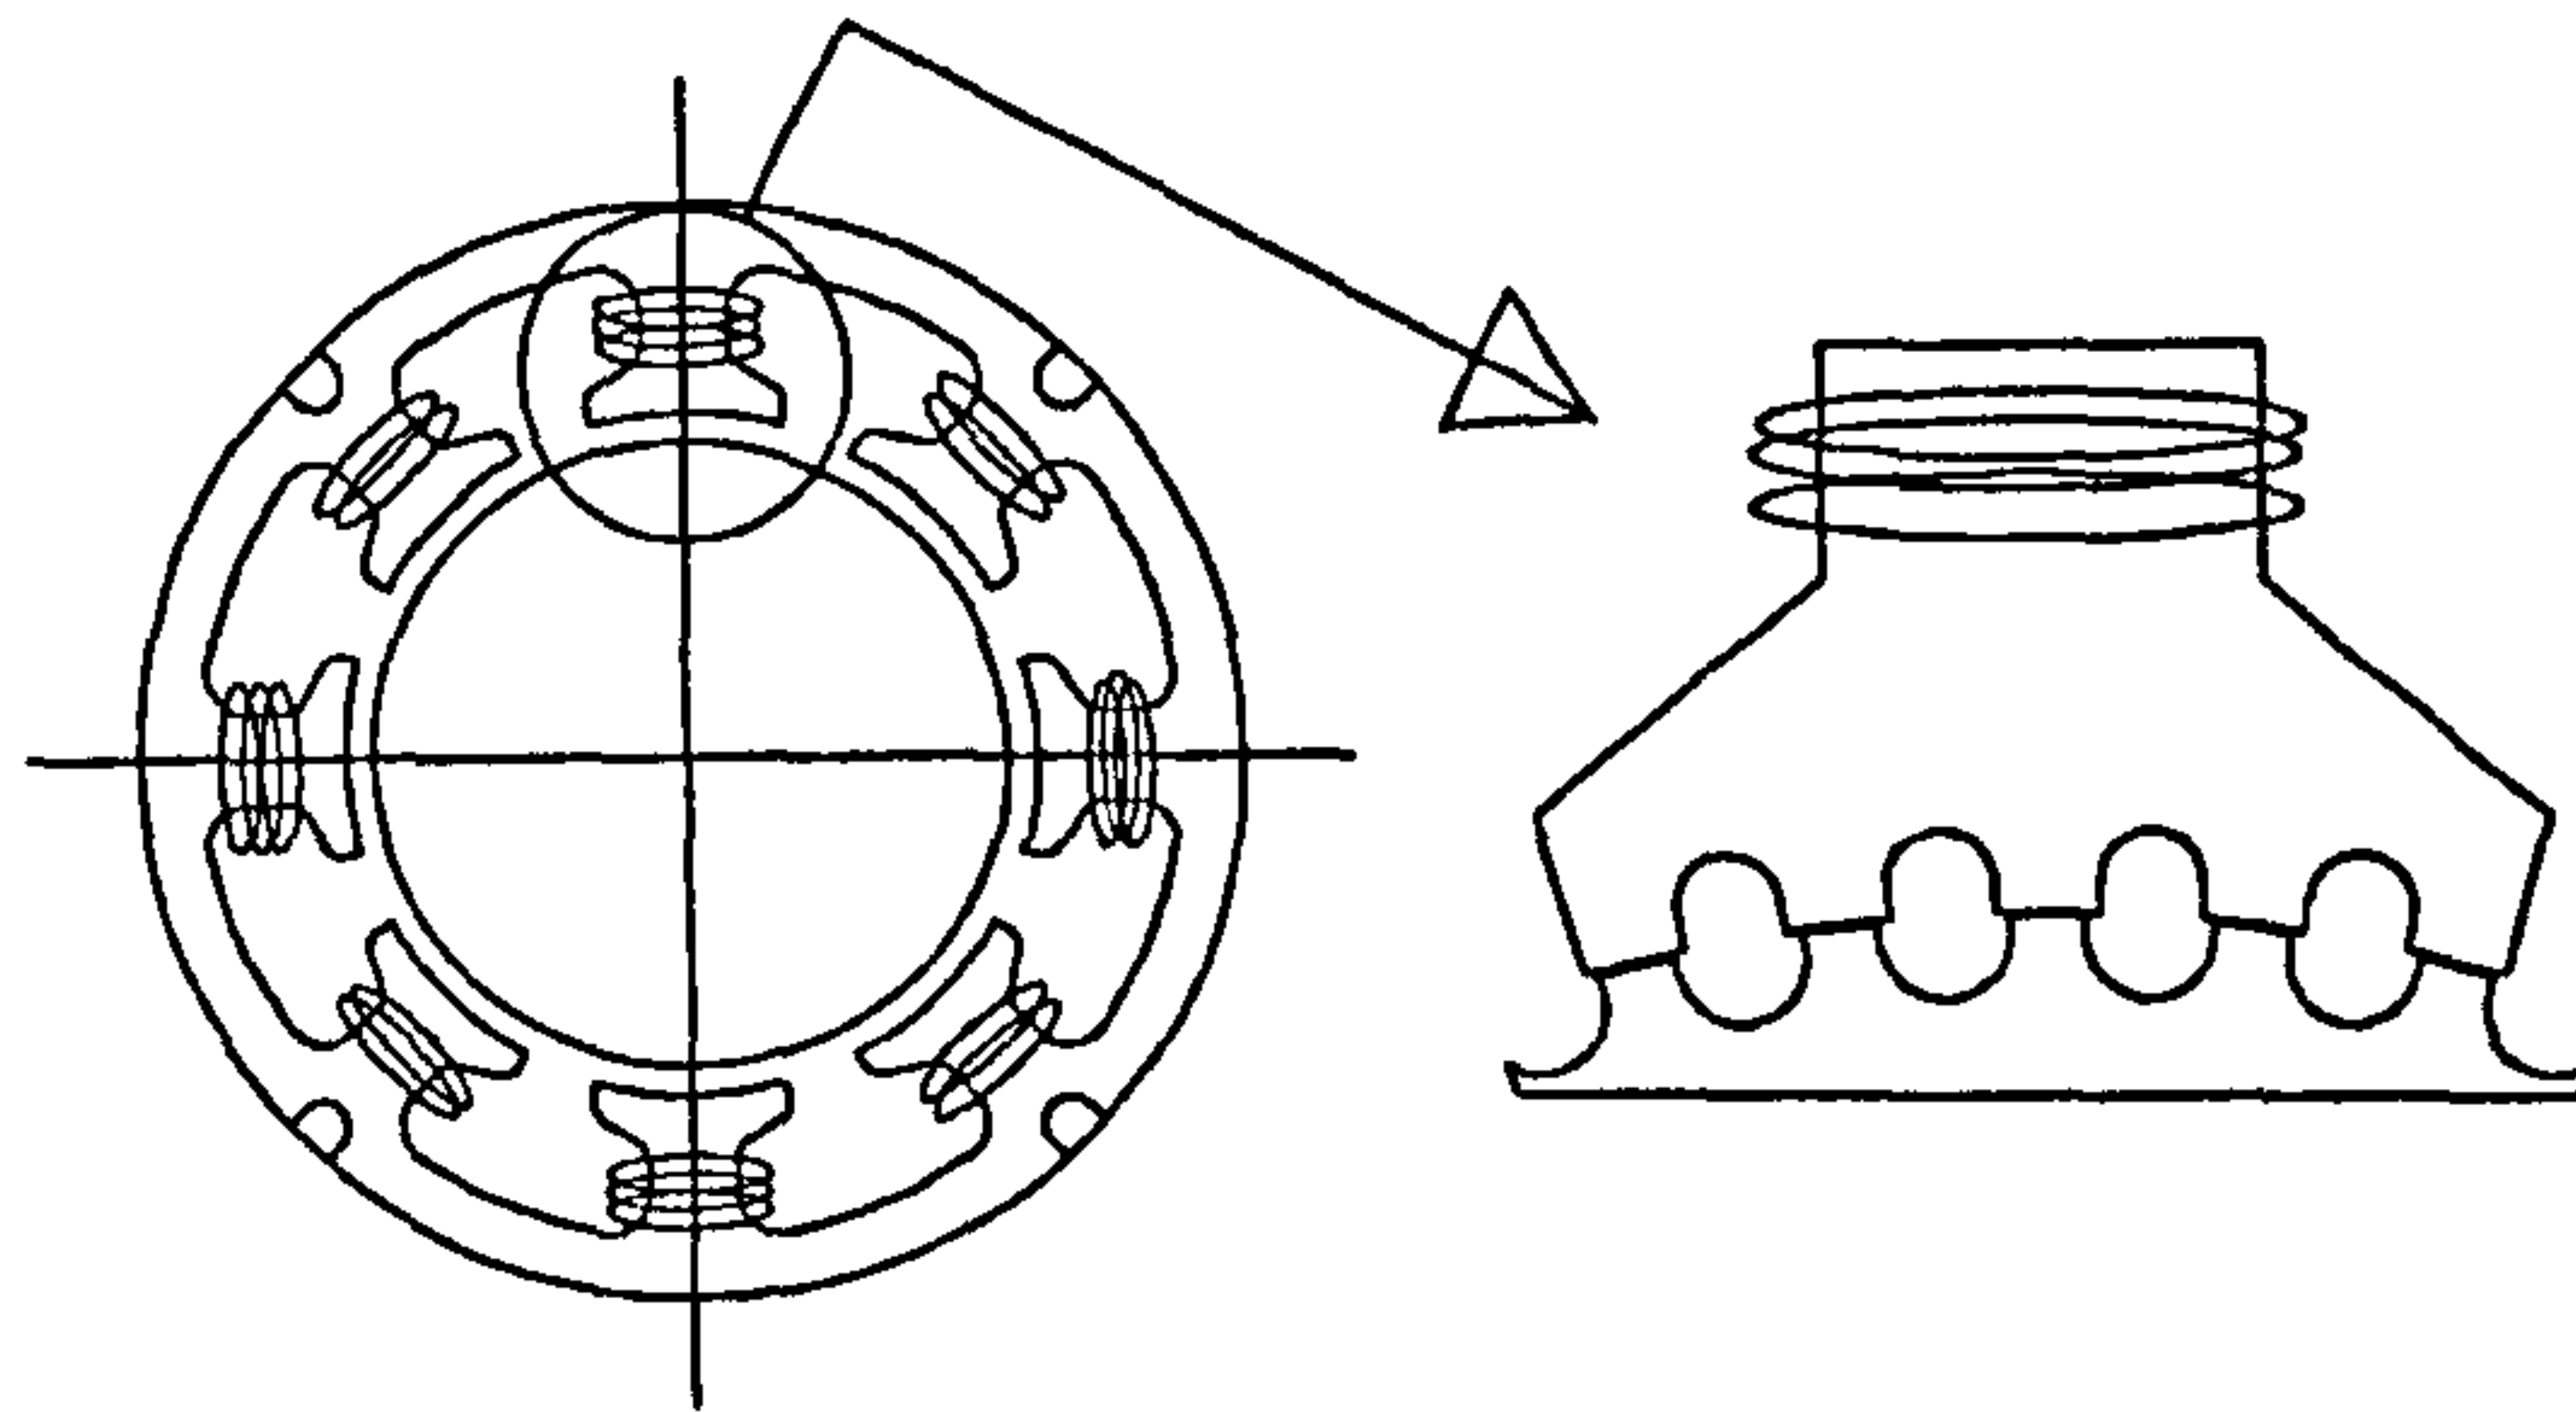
Front View of Motor Showing Aligned Position
